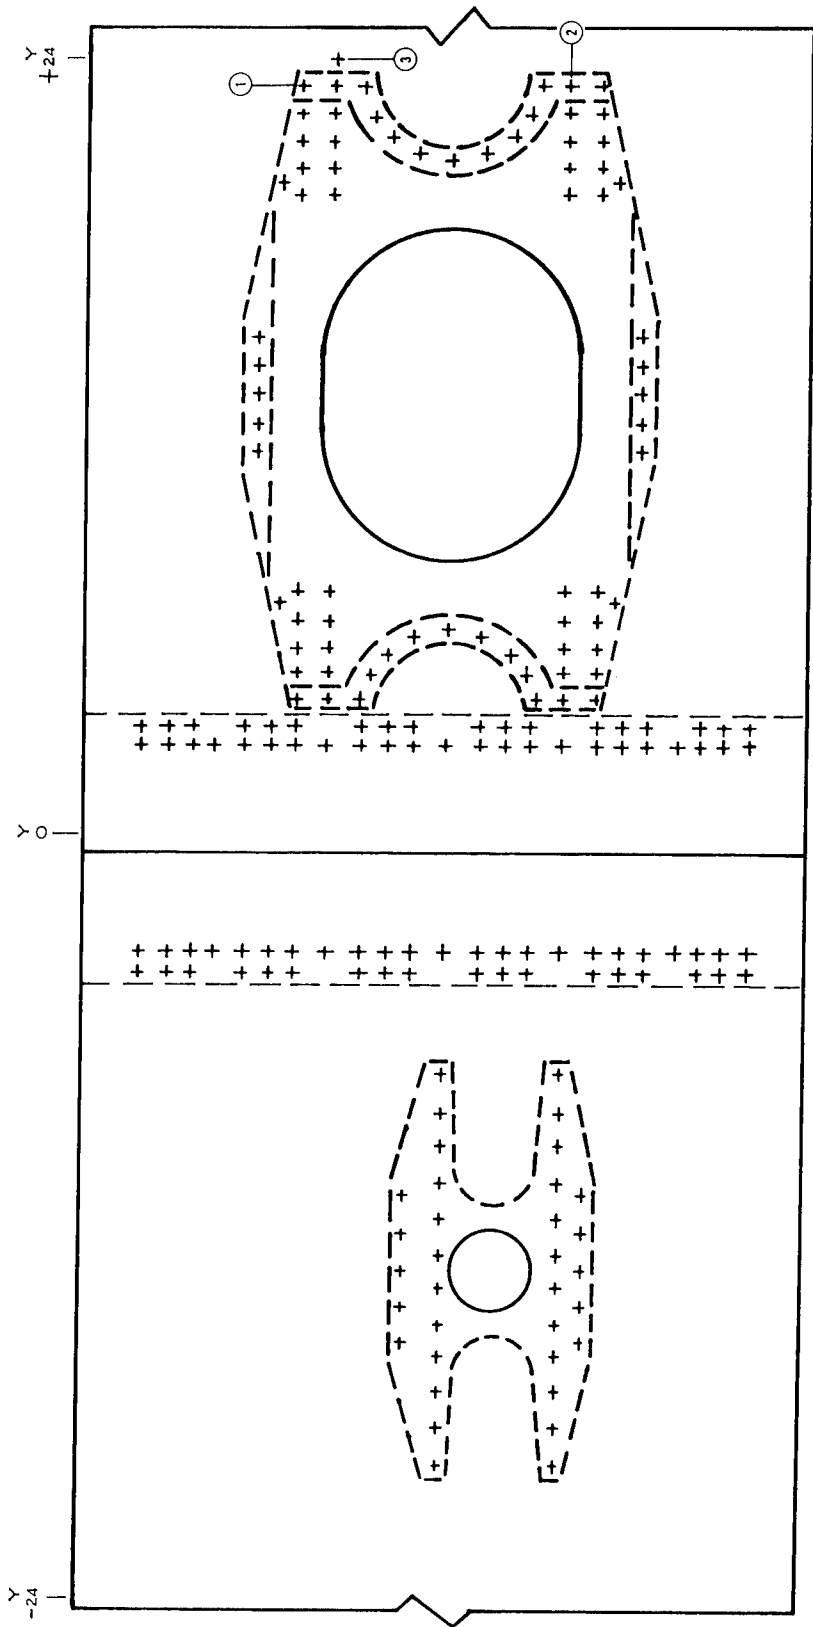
Fatigue Crack Locations in Riveted Test Specimen Number 6
